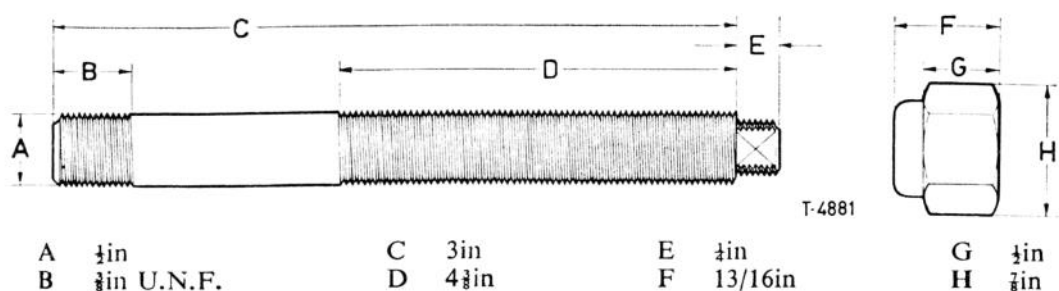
Extractor stud, alternative to service tool 18G6304M
